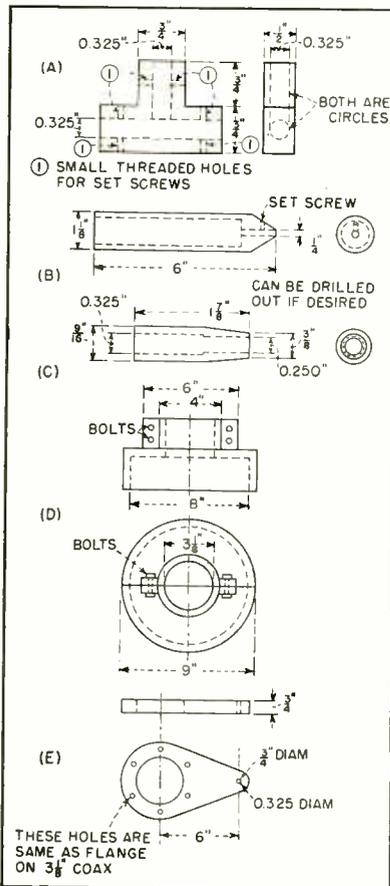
Dimensions of the parts used for matching sections and line attachment
